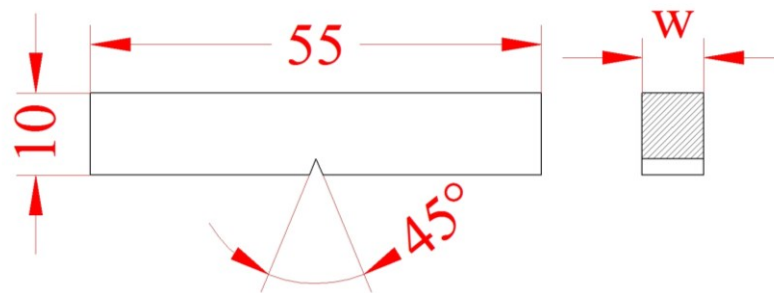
Dimensions for the Charpy pendulum impact test piece.
